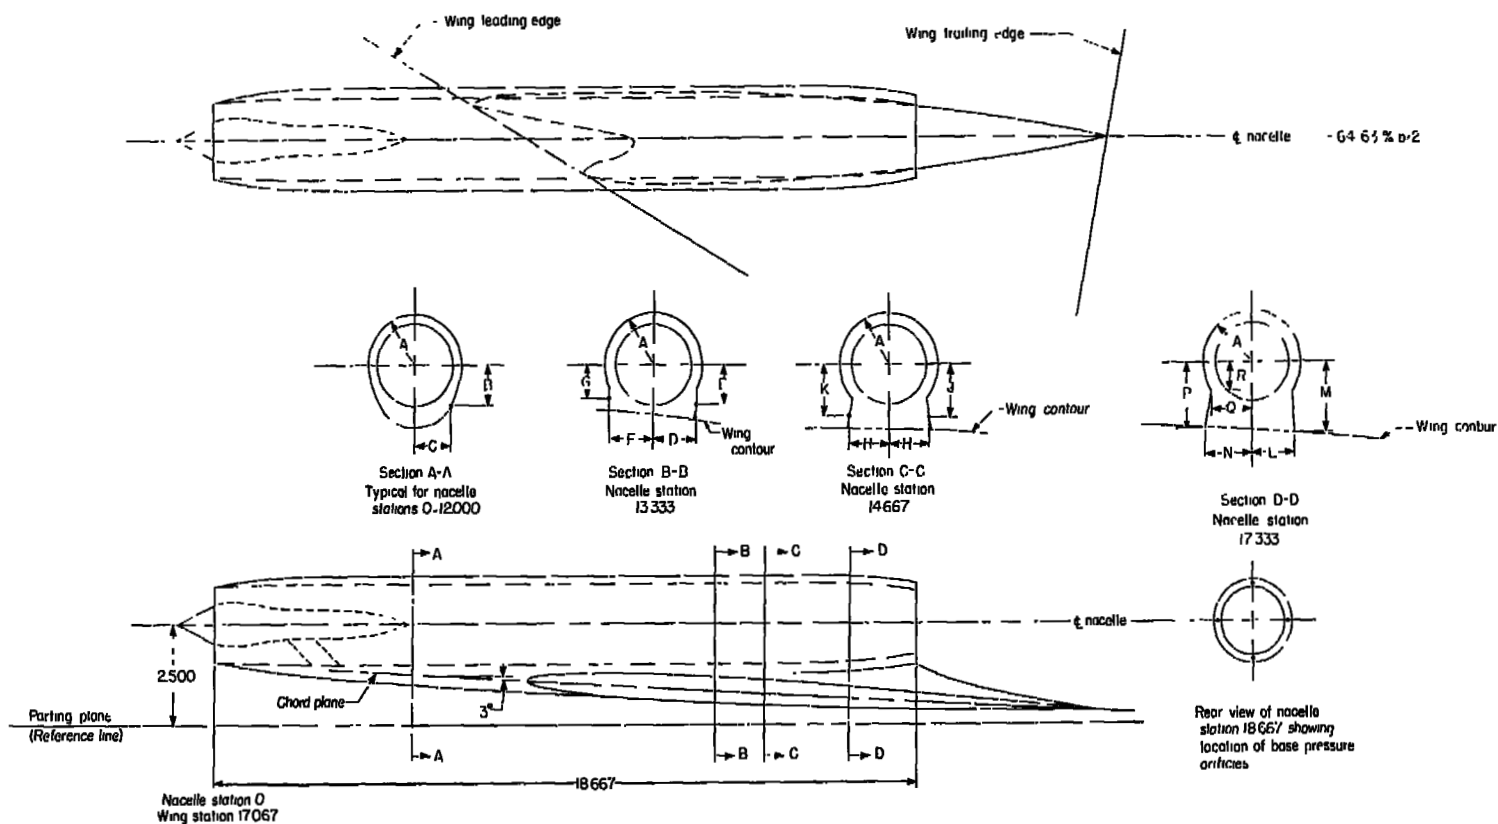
Details of outboard split nacelle. See table VI for dimensions not given on the figure. (All dimensions are in inches.)
